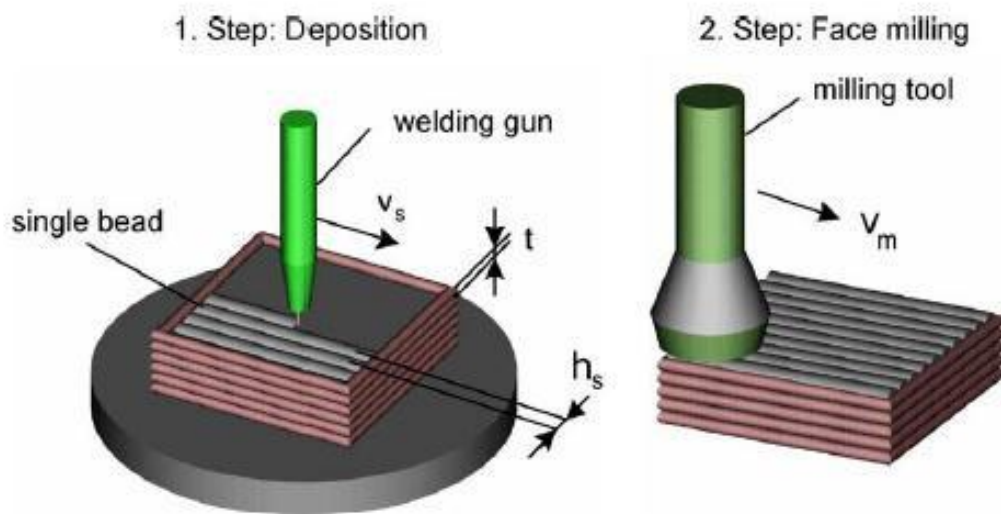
Schematic of welding based rapid prototyping
